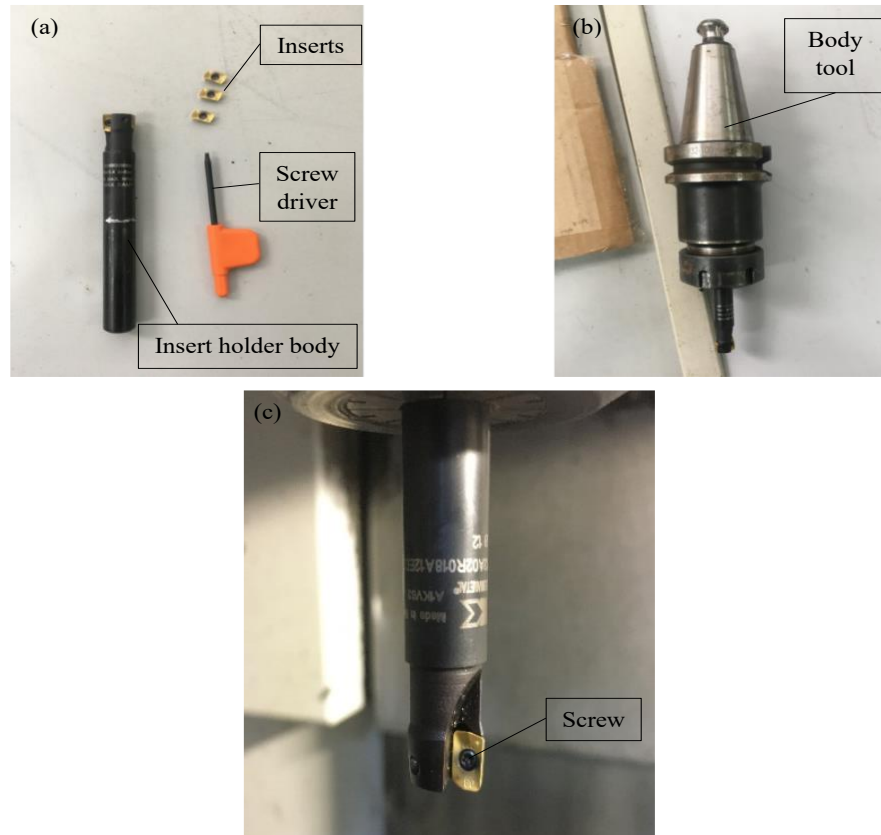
The inserts of coated carbide cutting tool; (a) before attached to the insert holder body, (b) during attached to the body tool and (c) after attached to the machine.
